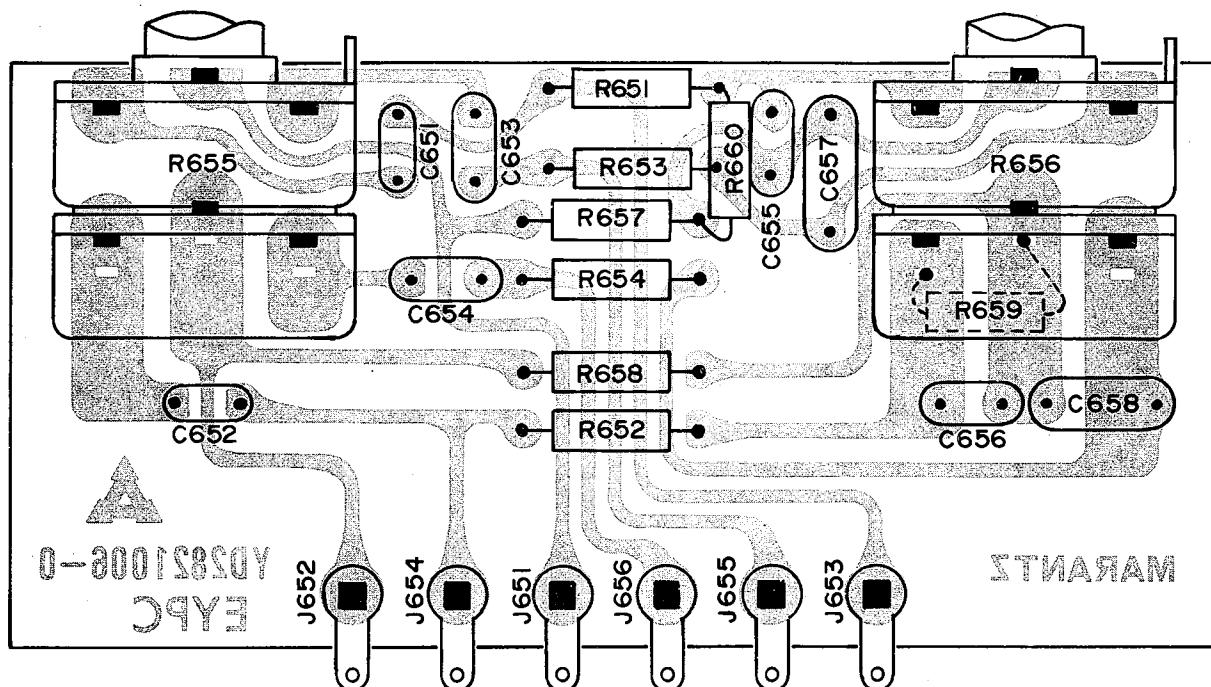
Tone Control Volume Unit Assembly P650 Component Locations
